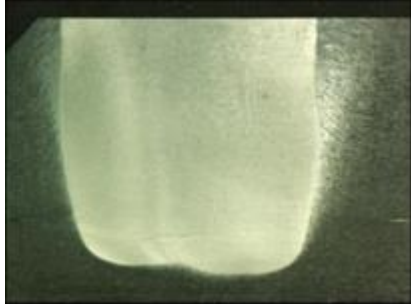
Cross-section of a Double Pass Weld.
